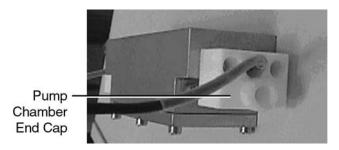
Removal of Pump Chamber Assembly End Cap for Solo I, II, III
